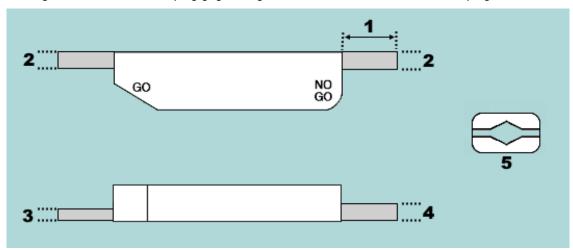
Recommended plug gage design for insulation barrel section of crimping chamber
